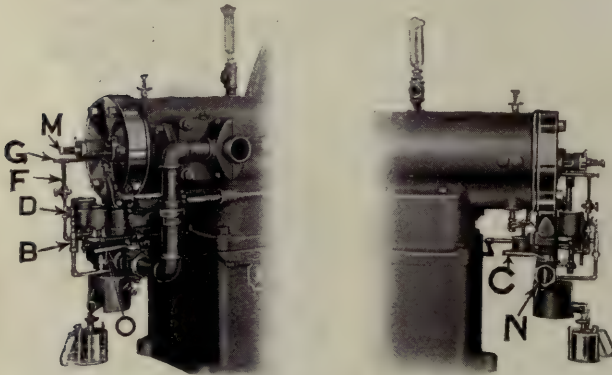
Showing Oil Engine Fittings for Oil Start. Fairbanks, Morse & Co.
